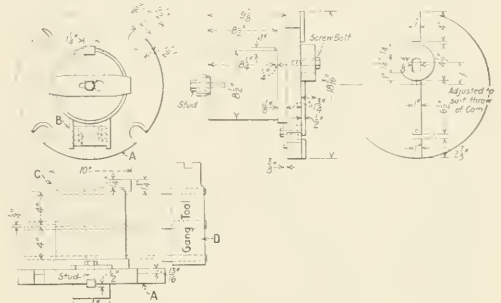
Adjustable Eccentric Cam Turning Mandrel
